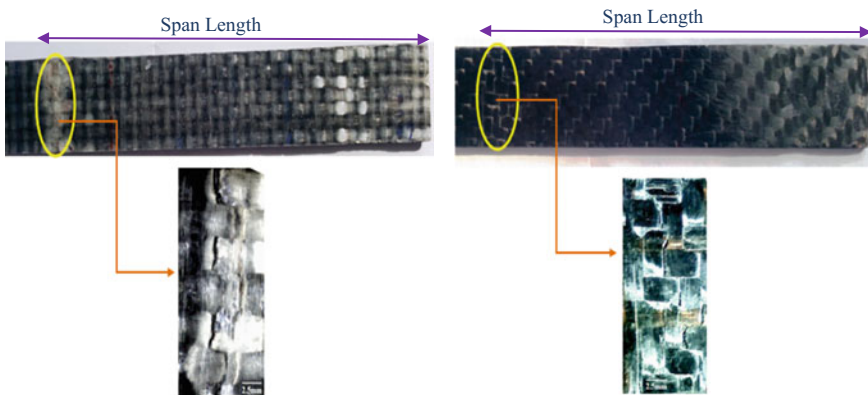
Macroimages showing failure surfaces of hybrid beams H1 and H2 at the fixed end after limited fatigue load
